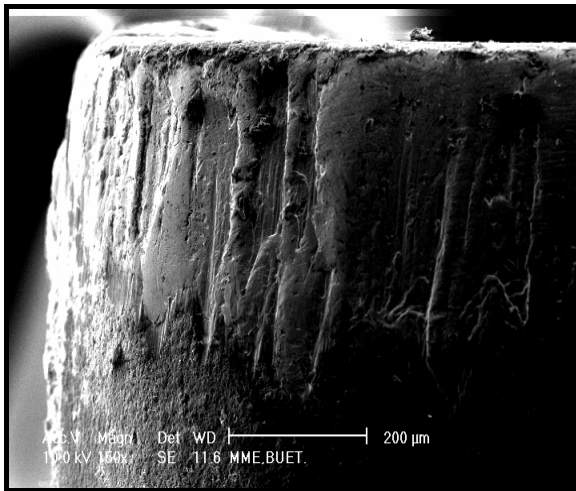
SEM view of principal flank wear of the worn out insert after machining 50 minutes under dry machining conditions.
